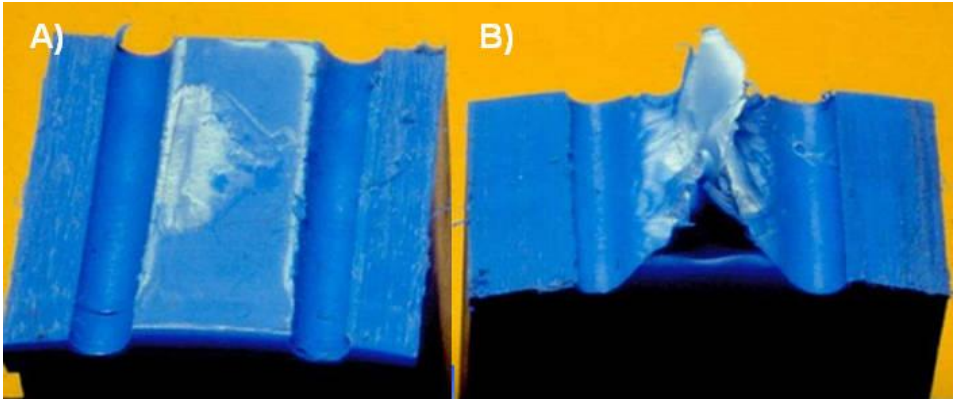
Example of: a) brittle failure and b) ductile failure in a tensile test with a wasted specimen geometry
